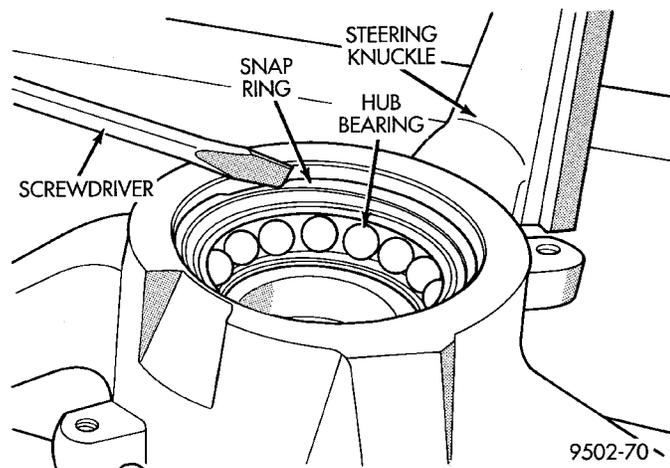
Hub Bearing Retaining Snap Ring Removal
